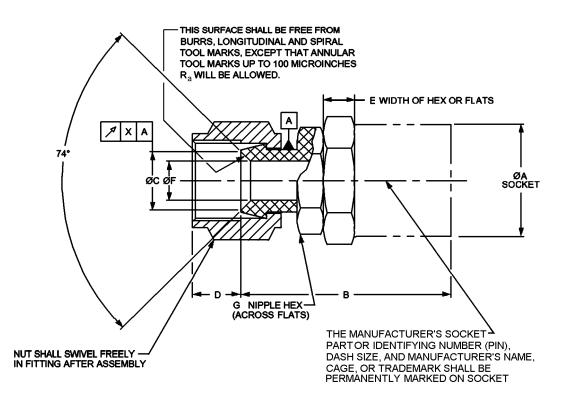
Fitting end, straight, flared tube dimensions and configuration.
